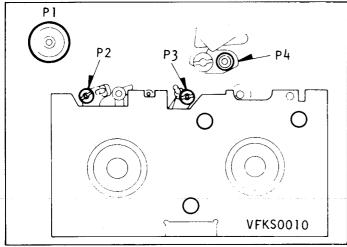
Height Adjustment of Tape Guide Posts - (1)
